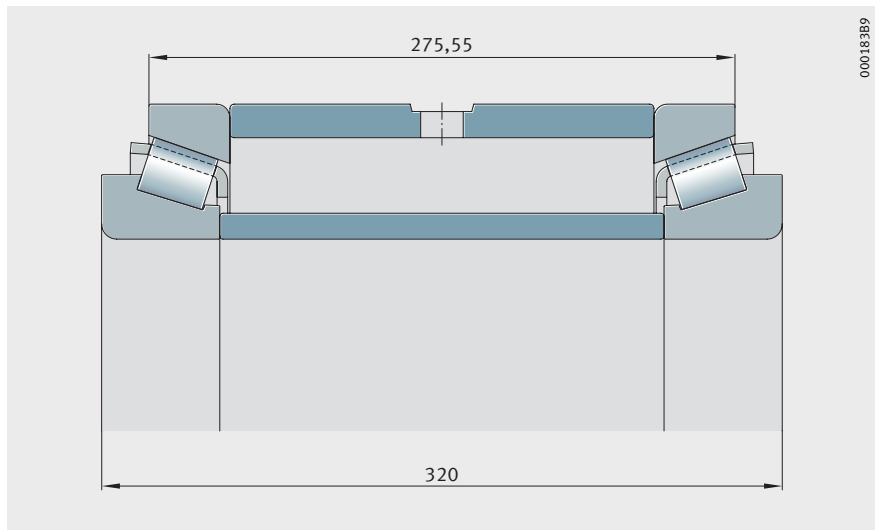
· Adjusted bearing arrangement for deflection sheaves
